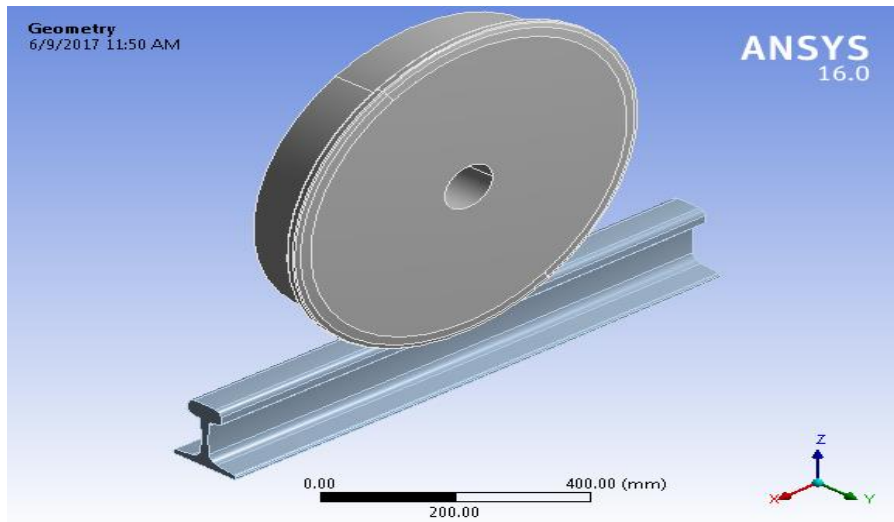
Wheel/rail assembly imported to ANSYS16 workbench.
